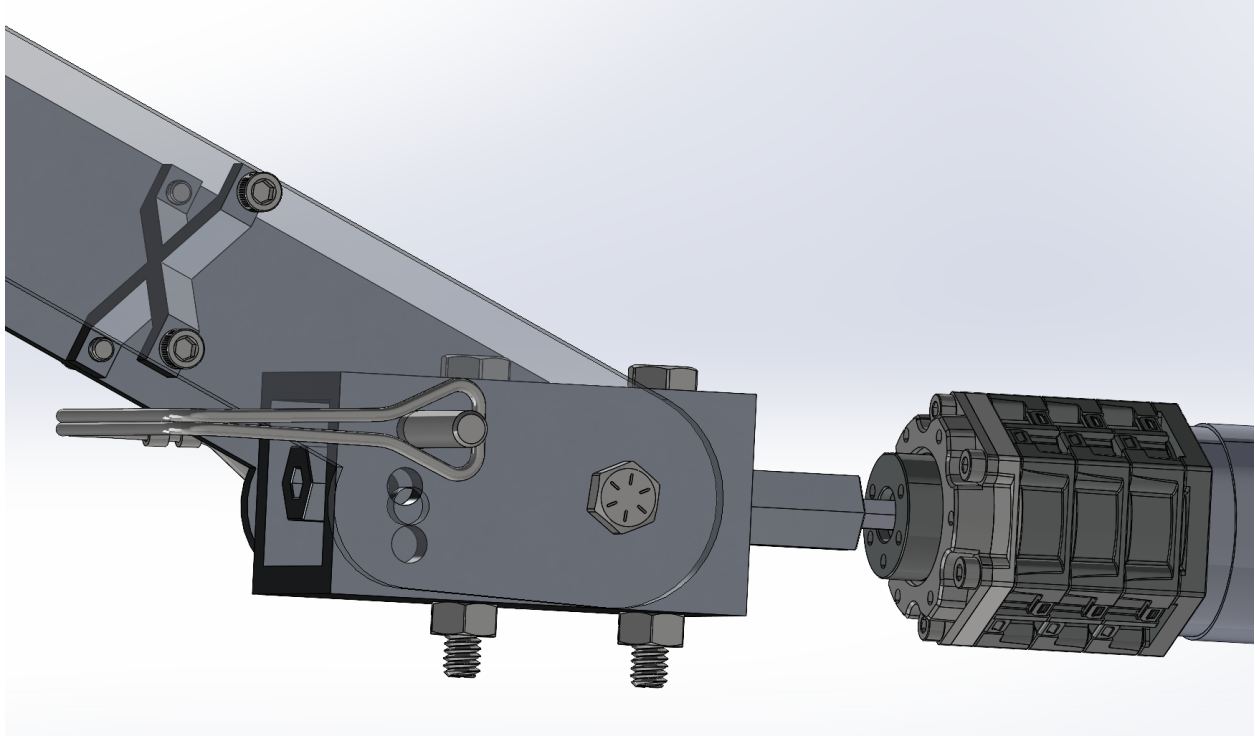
Close-up view of the main arm components, including the X-brace, adjustable pin block, and motor with gearboxes.
